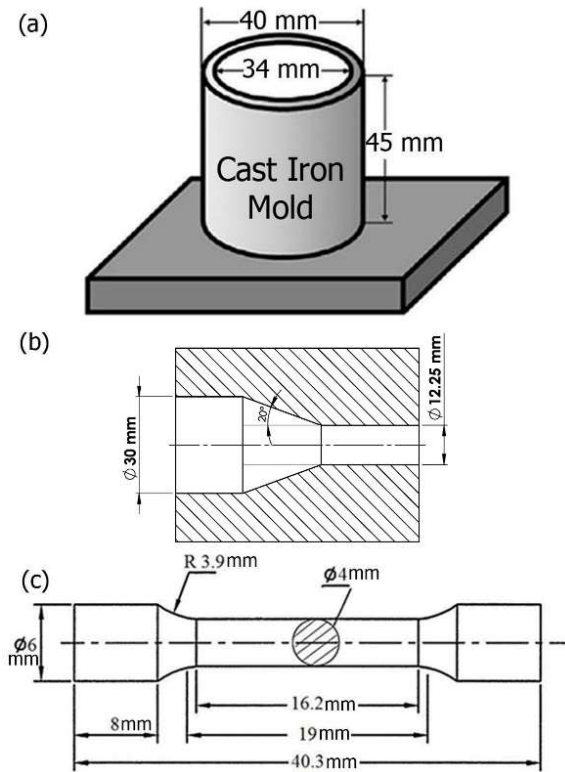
Schematics of the (a) mold, (b) extrusion process, and (c) tensile testing sample.
